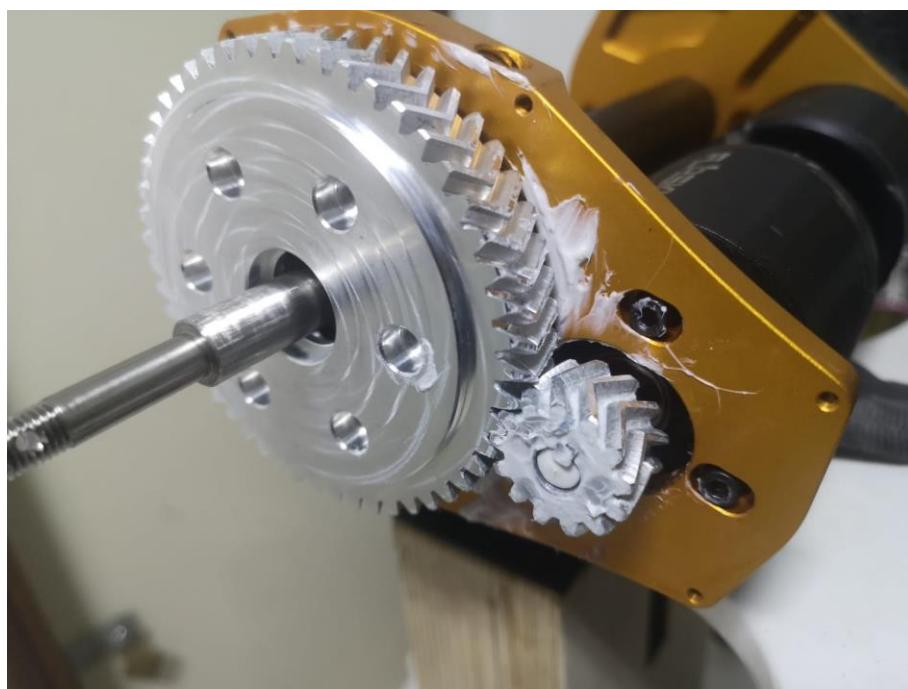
Illustration of an opened Gear Drive mechanism installed in a longboard's hanger
